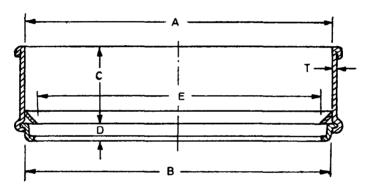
DIMENSIONS OF FRAME FOR TEST SIEVE
